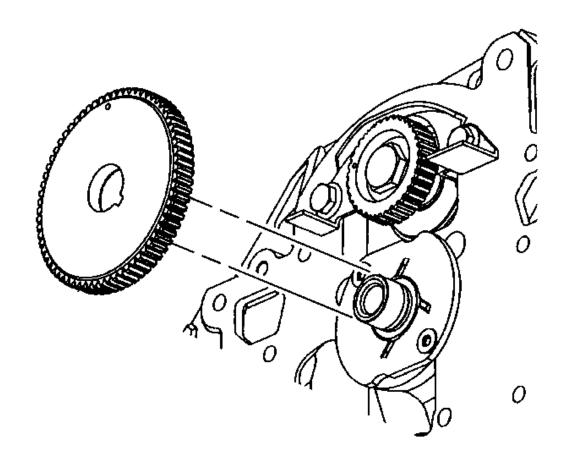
Camshaft Sprocket & Timing Chain Courtesy of GENERAL MOTORS CORP.
